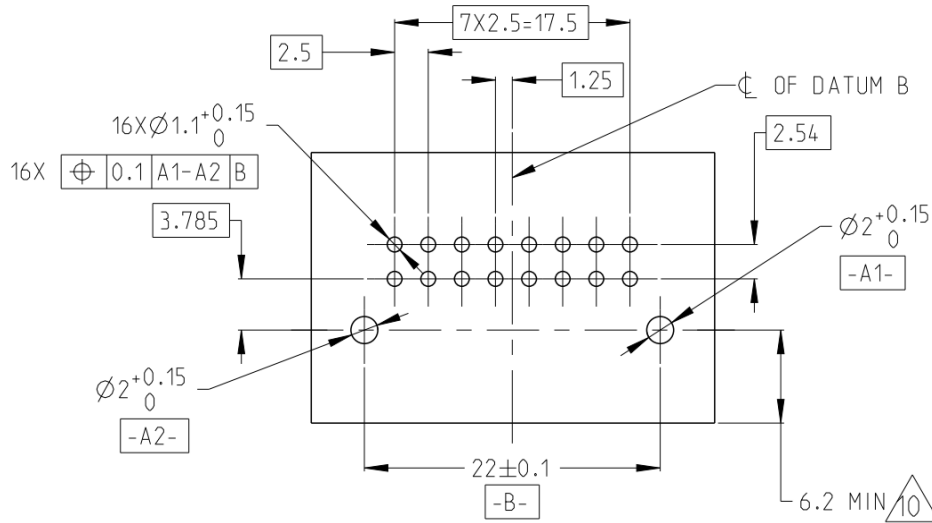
Recommended PCB Lay-Out (Thickness 1.6±0.14mm)
